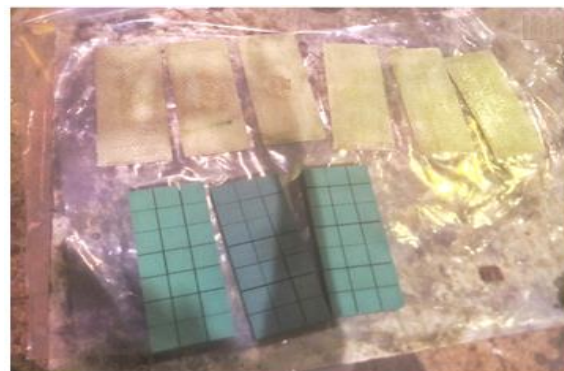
Face-sheets fabricated by vacuum infusion after cutting and before adhesively bonding to the grooved foam core
